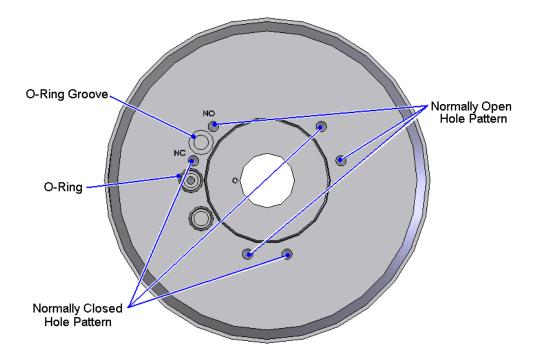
Gripper Mounting Hole Locations in ACS and ACS LP Shaft
